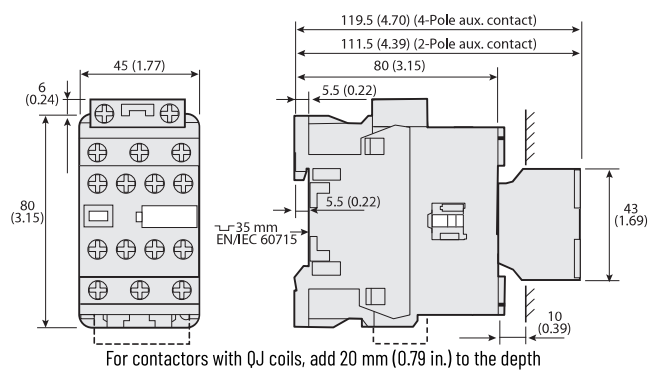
100-E26...100-E38 4-Pole Contactors with Standard Coils and Front-mounted Auxiliary Contact
